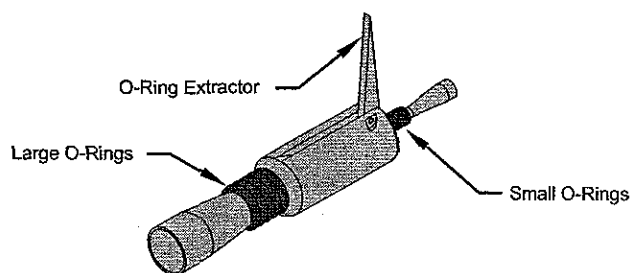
Ultraflow™ O-ring tool with large and small O-rings
